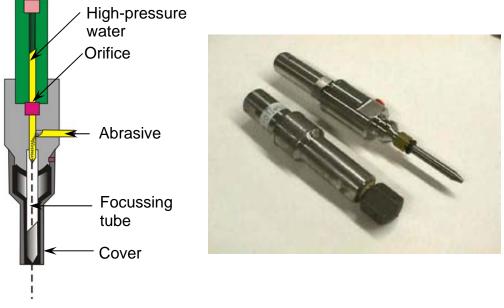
Schematic and photographic view of the cutting head (Photograph Courtesy – Omax Corporation, USA)
